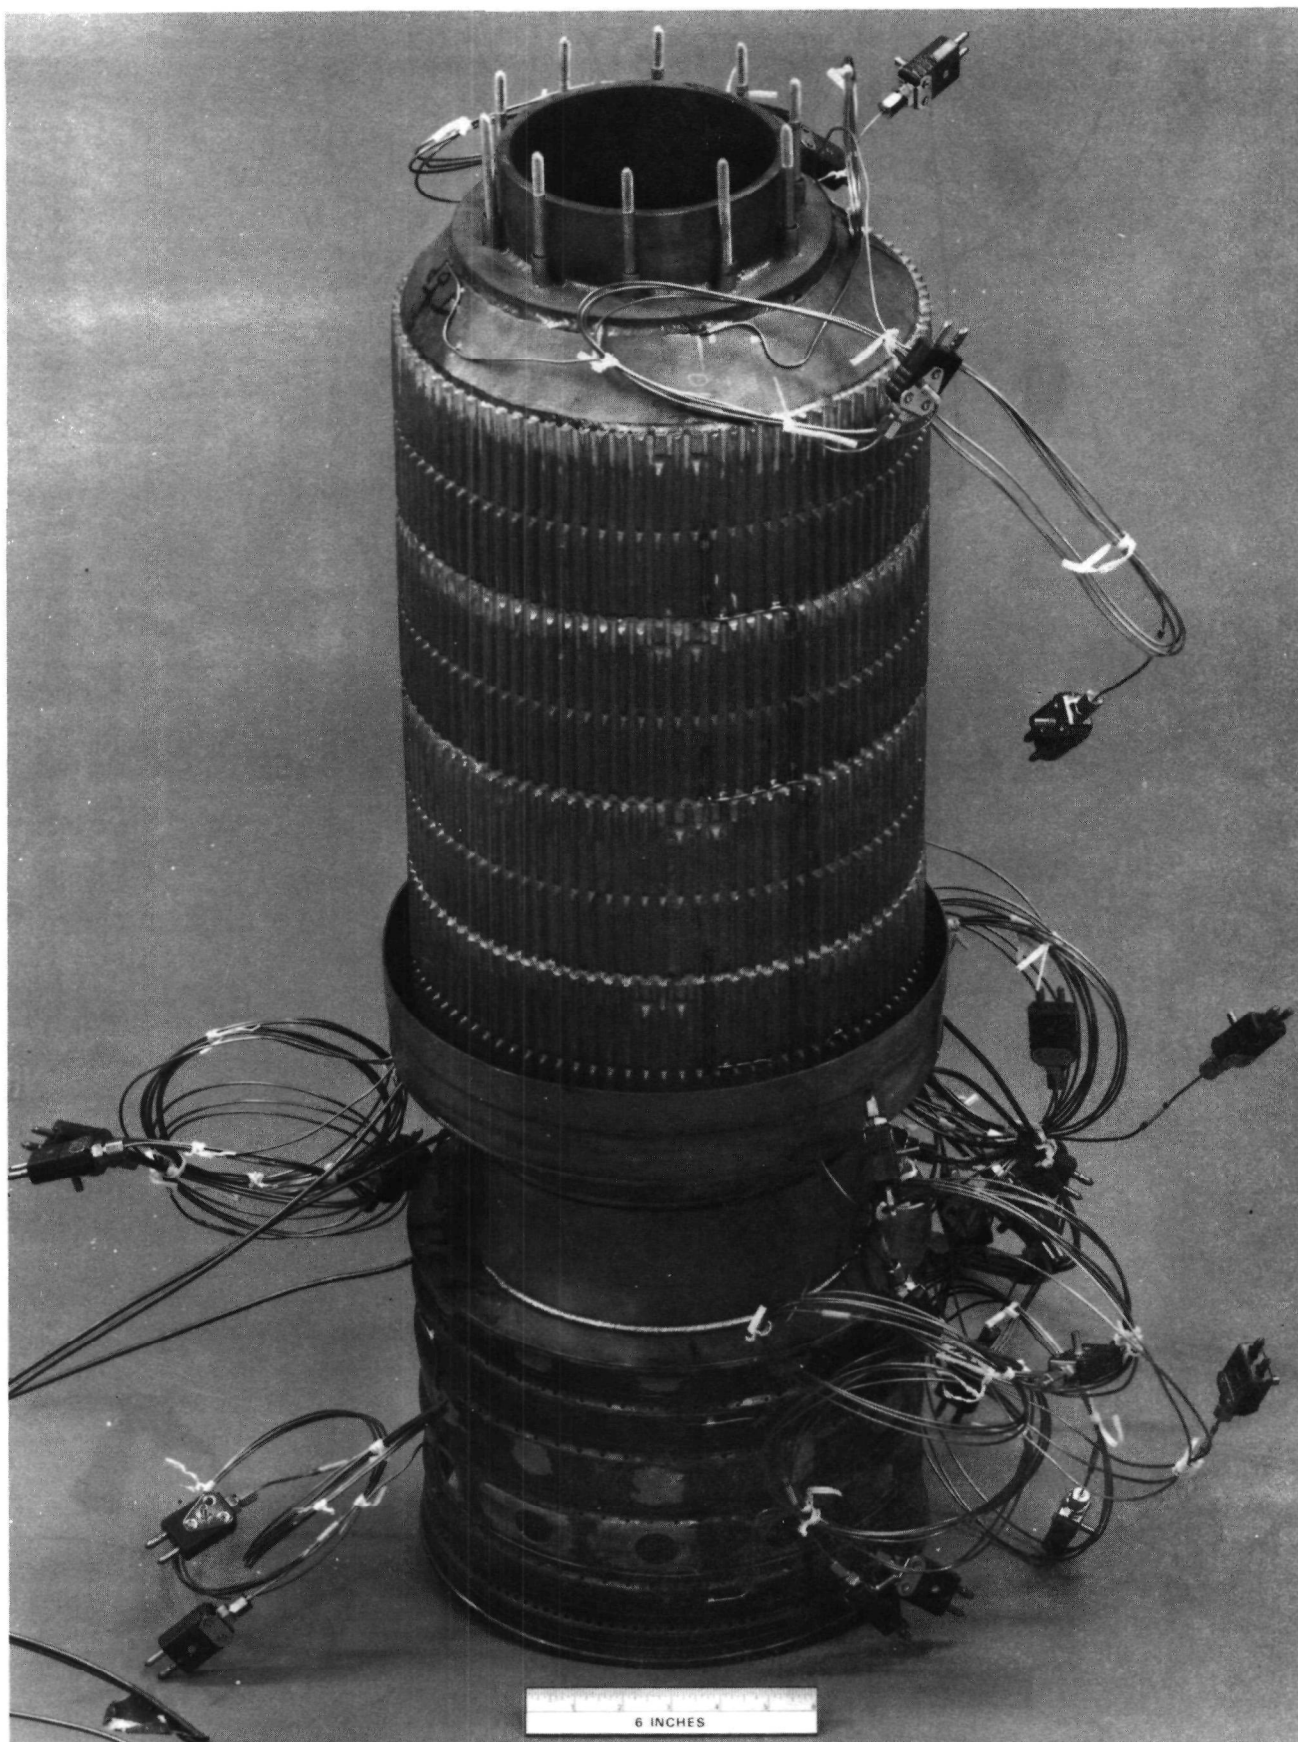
Full-Scale Combustor During Assembly (FRT Version)
